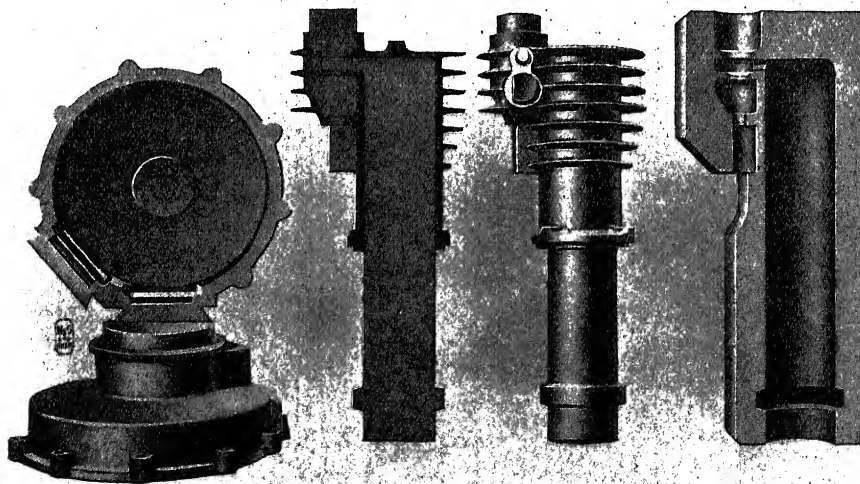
Cylinder Pattern for Motor-cycle Engine
